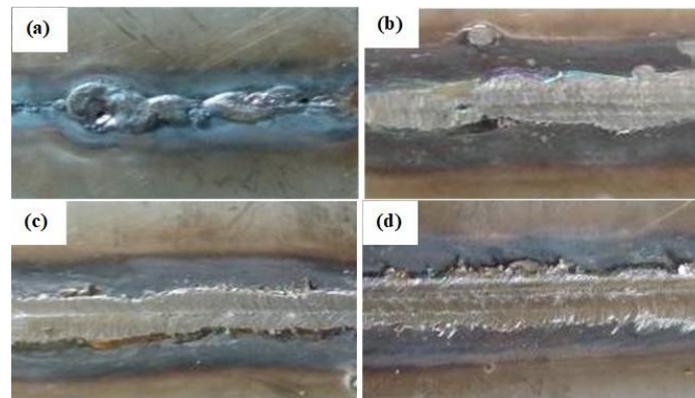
Surface appearance of the as-welded and FSP'ed AISI304 samples (a) as-fusion welded joint, and FSP'ed at (b) 710 rpm, (c) 900 rpm, and (d) 1120 rpm
